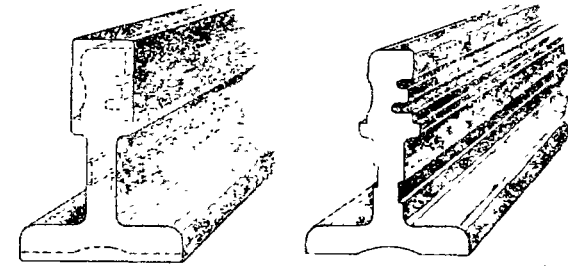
Machining cost of long cast iron frame members is minimized by redesigning the section to an aluminum extrusion.
